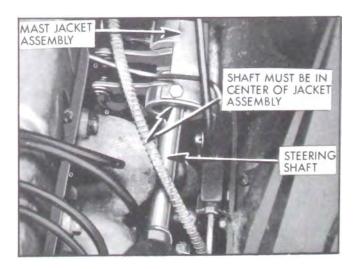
Steering Shaft to Mast Jacket Alignment
